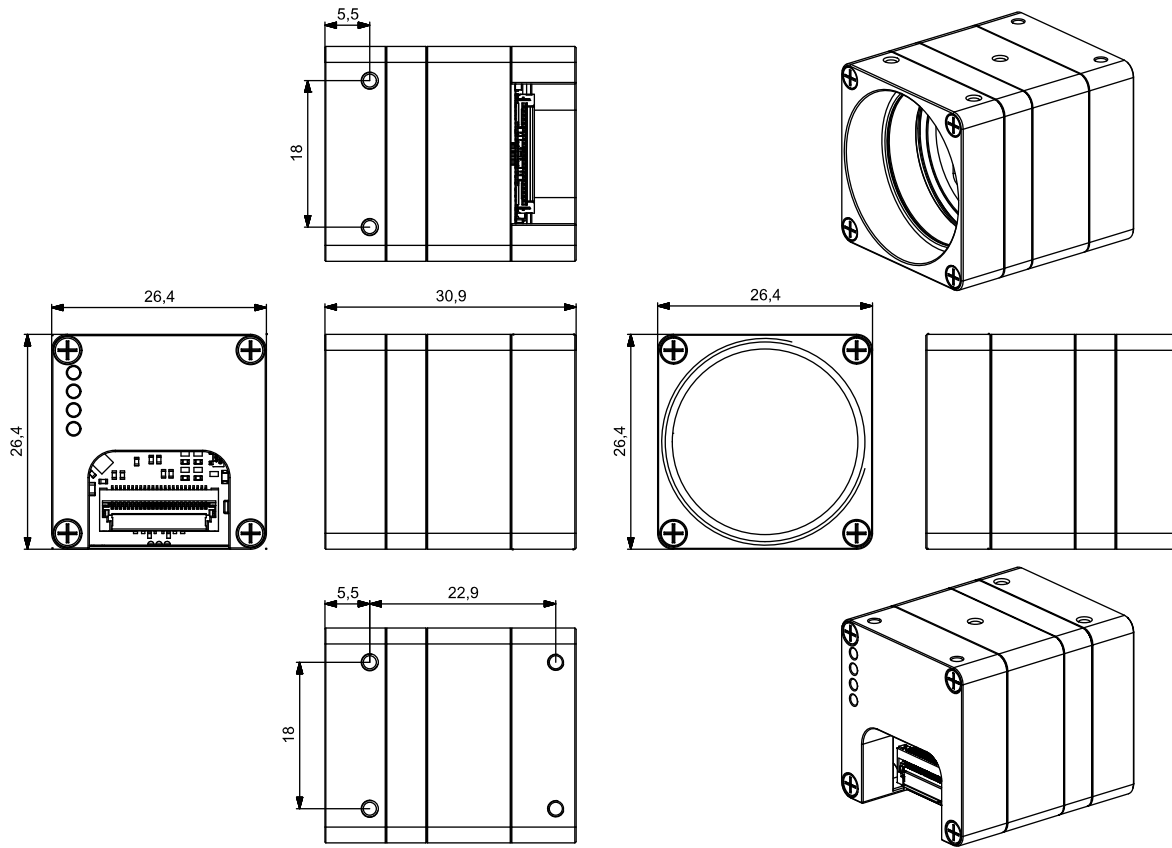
Dimensional drawing of MX089/124xG-SY-X2G2-FL (C-mount (with C-mount module B))
